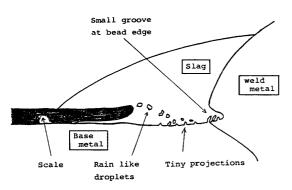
Schematic illustration showing phenomena occurring under the slag at the bead edge in as-rolled plate welding.
